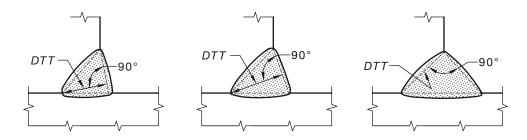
DESIGN THROAT THICKNESS OF COMPOUND WELDS WITH INCOMPLETE PENETRATION WELDS
